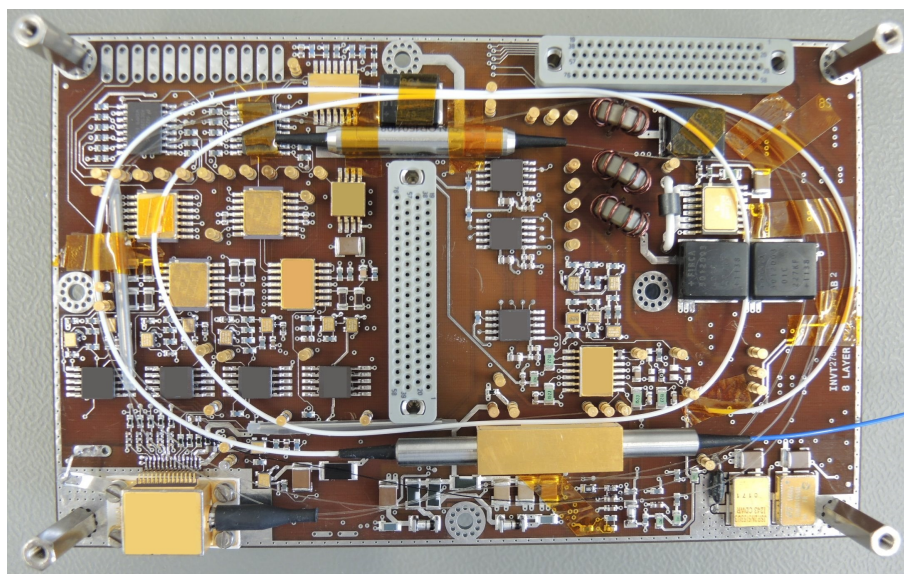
Picture of the AFE engineering model (EM) with MG-Y laser (bottom left), polarization switch (bottom center) and optical isolator (top center) mounted onto the PCB.
